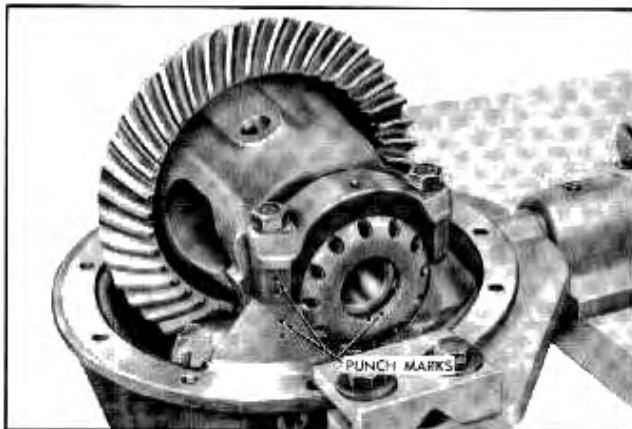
Bearing Cap and Adjusting Nut Marked for Side Location
